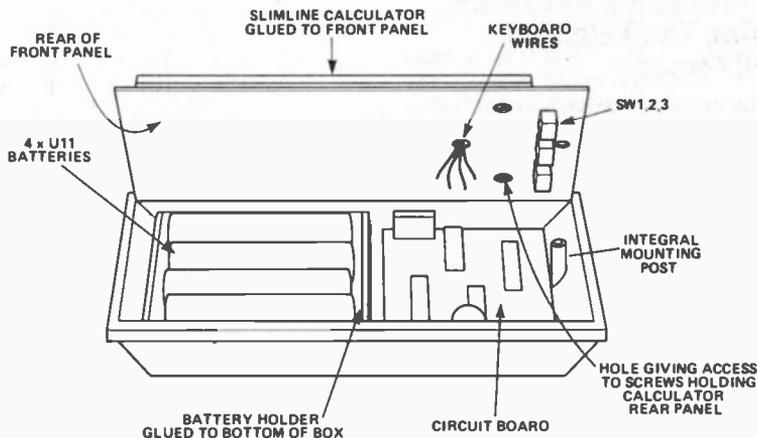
Mounting of LCD slimline calculator to front panel of flip-top box.
